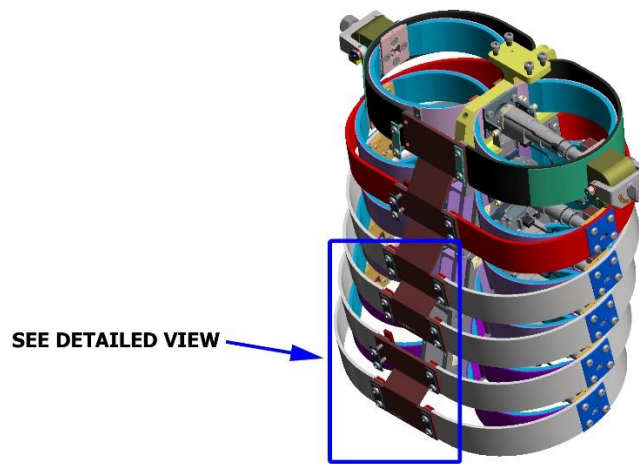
Attaching thorax and abdominal mounting strips to the bottom two ribs.
